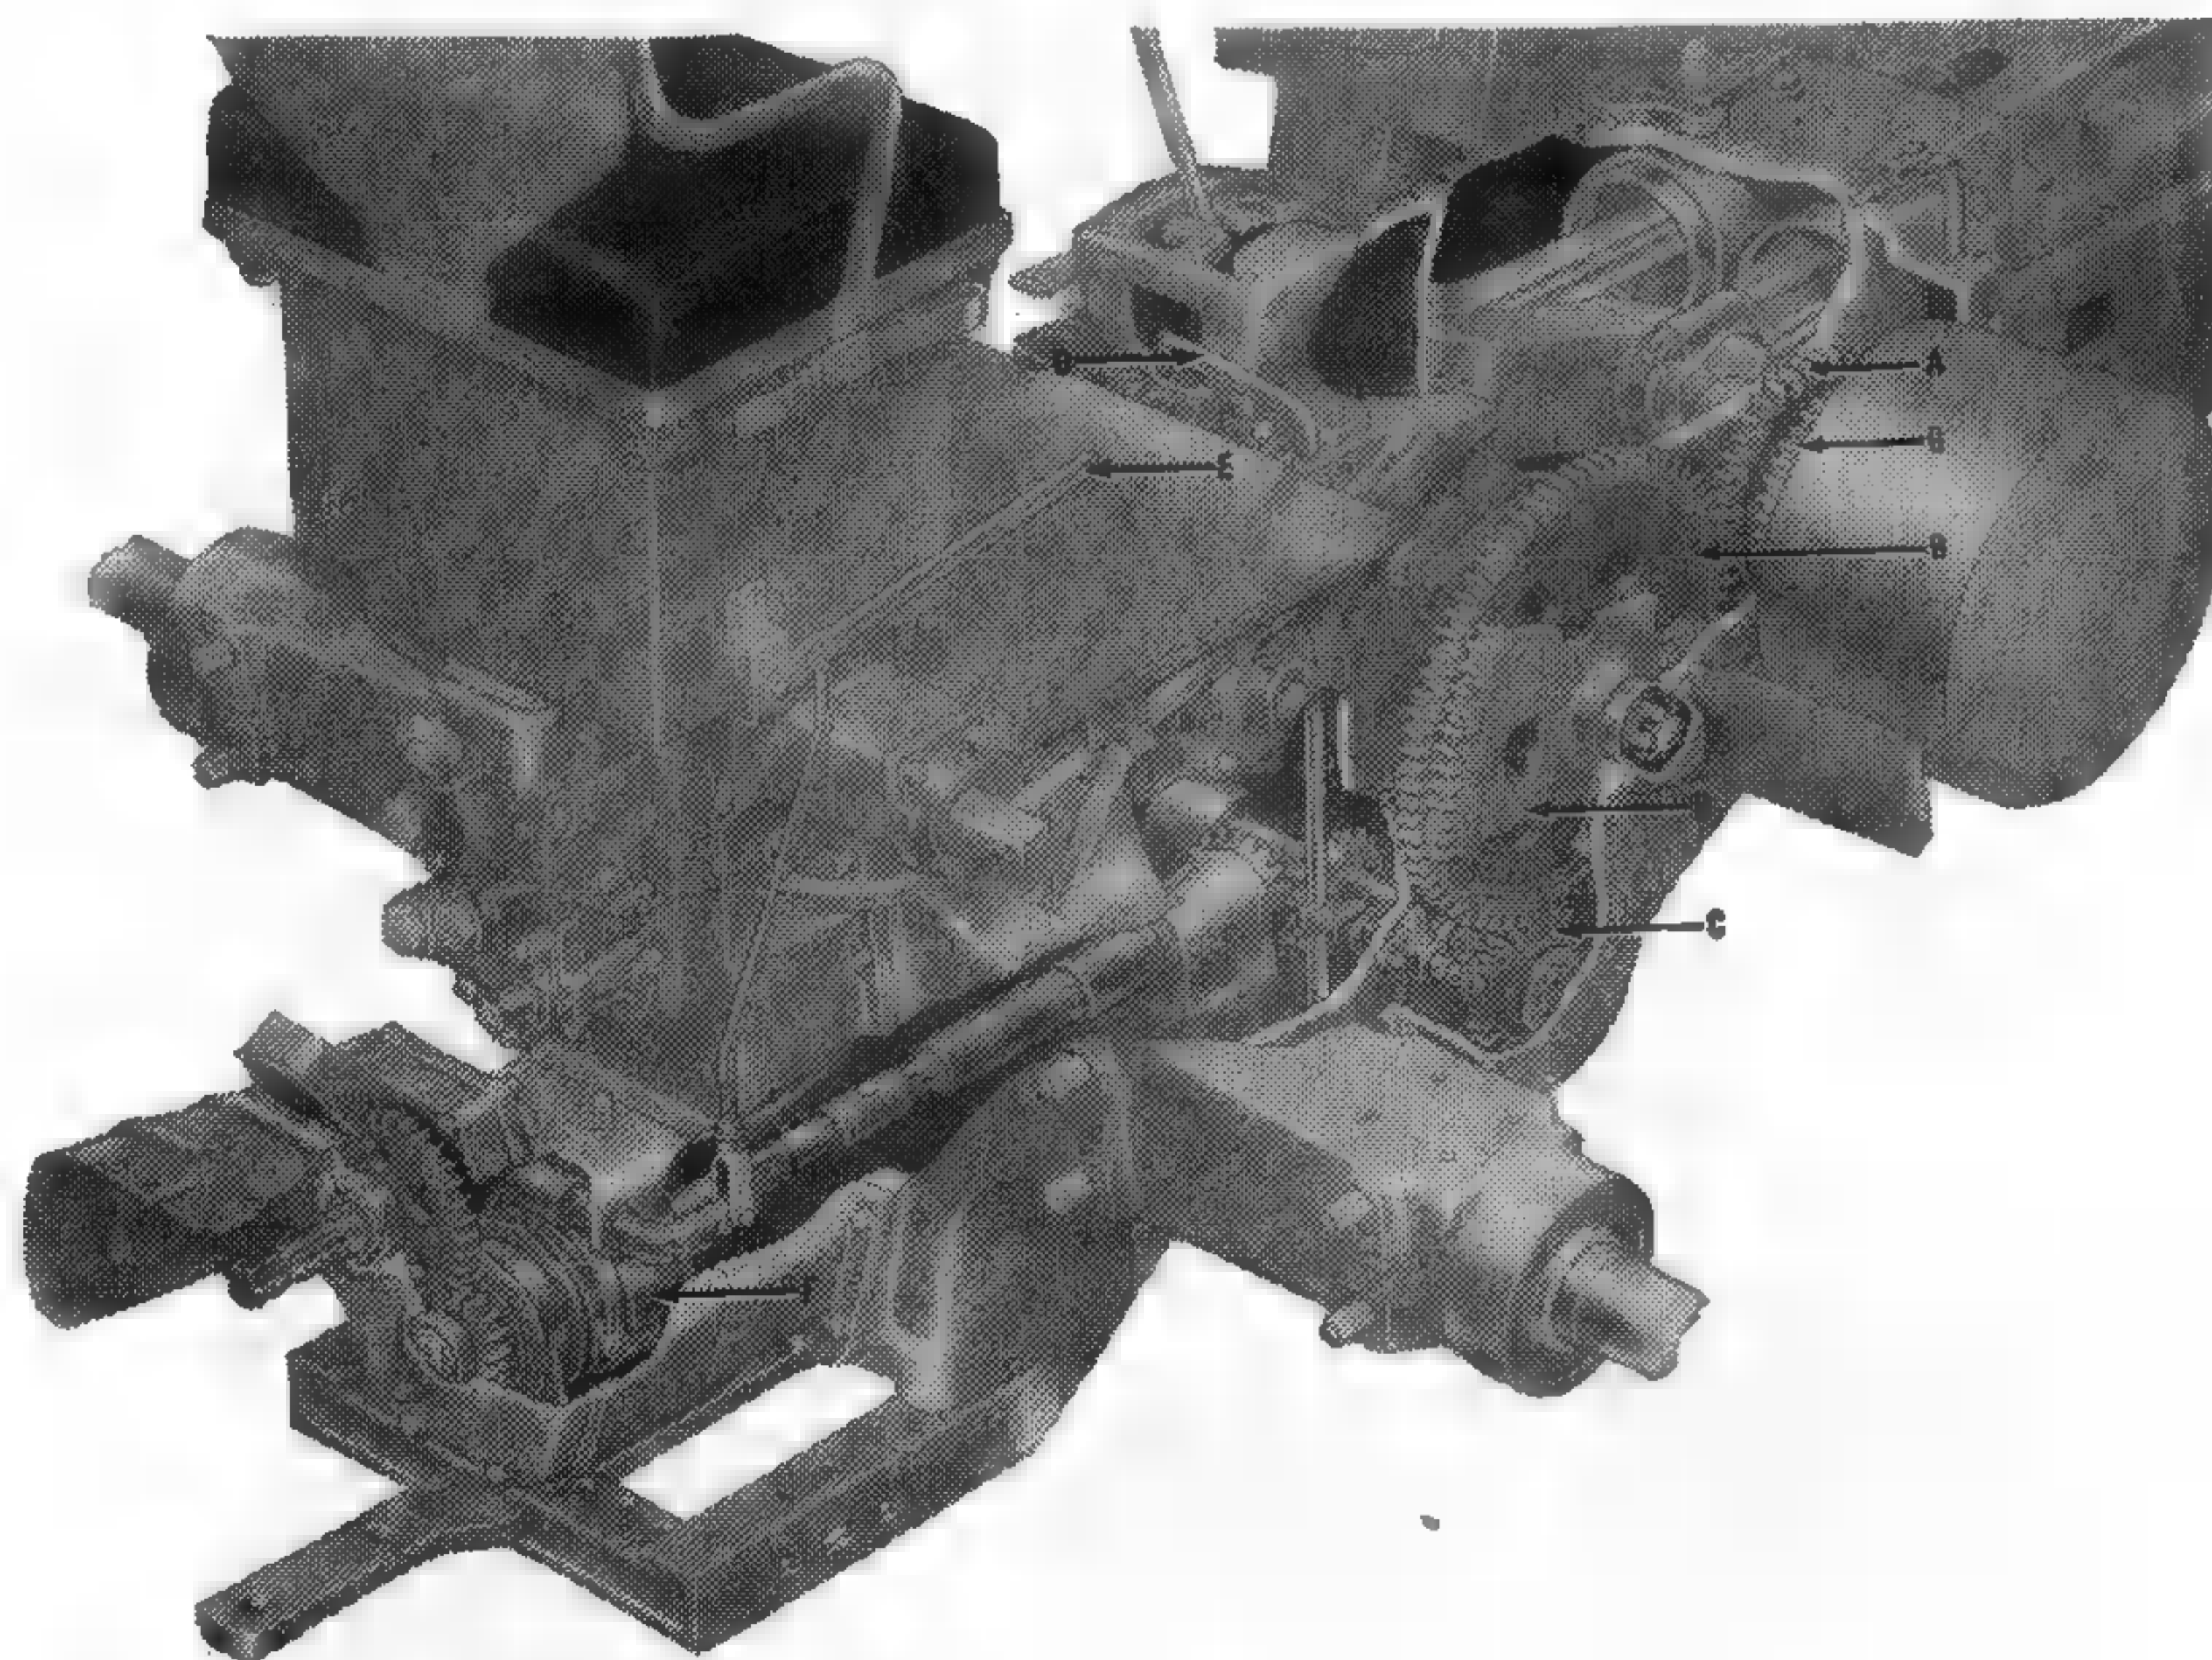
This tractor has been cut away to show the power take-off power train. Sliding gears and drive shafts operate in oil. (A) power shaft idler drive gear; (B) power shaft idler gear; (C) sliding gear and shaft; (D) shifting lever for sliding gear and shaft; (E) power shaft clutch lever; (F) power shaft clutch; (G) belt pulley gear and (H) first reduction gear.
